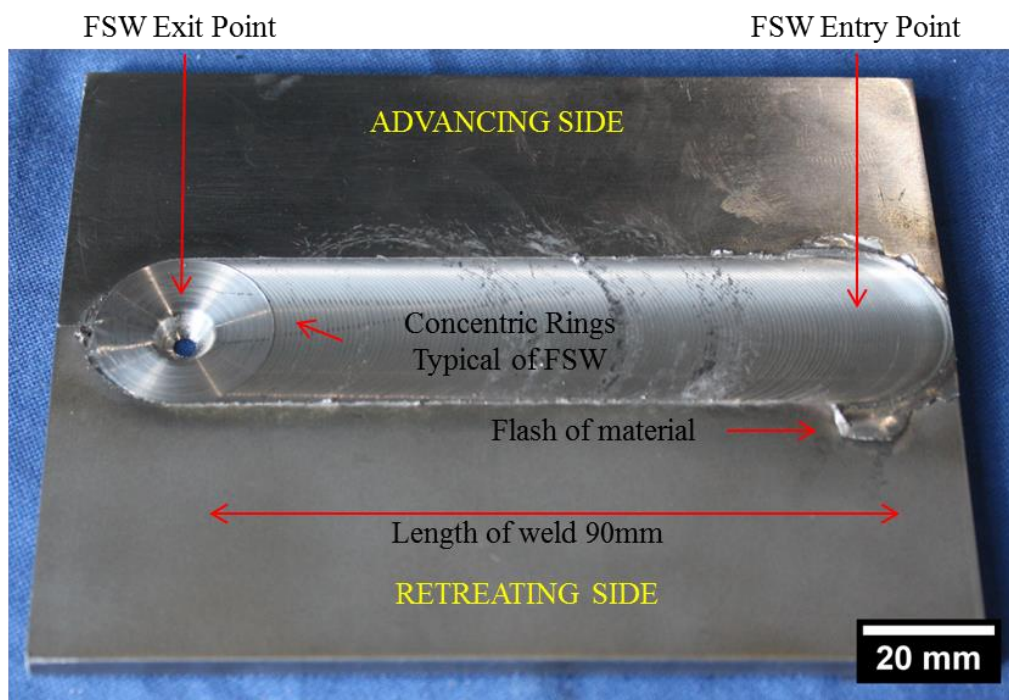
Optical macrograph of the completed W34 weld. Notice the exit hole where the tool has penetrated right through the plates.
